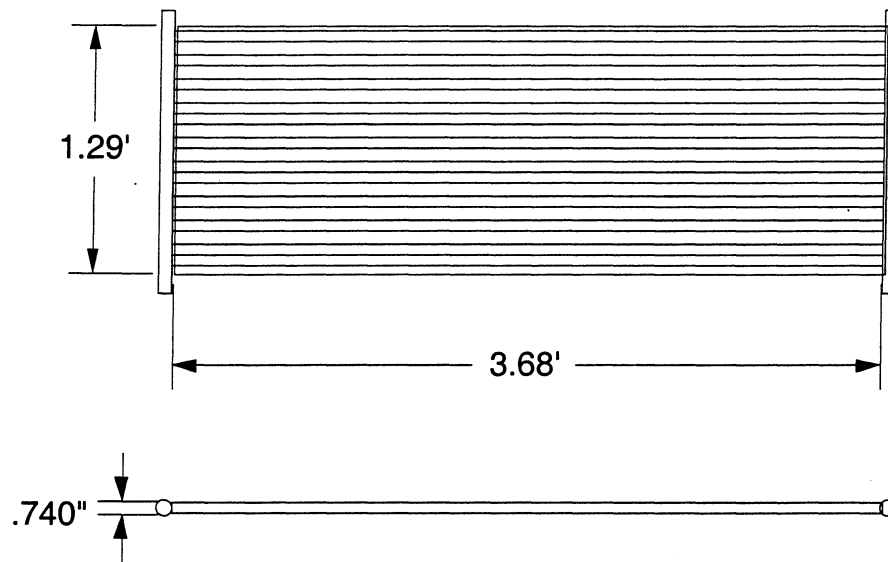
Dimensions of flattened evaporator coil for 4.75 ft² face area design
